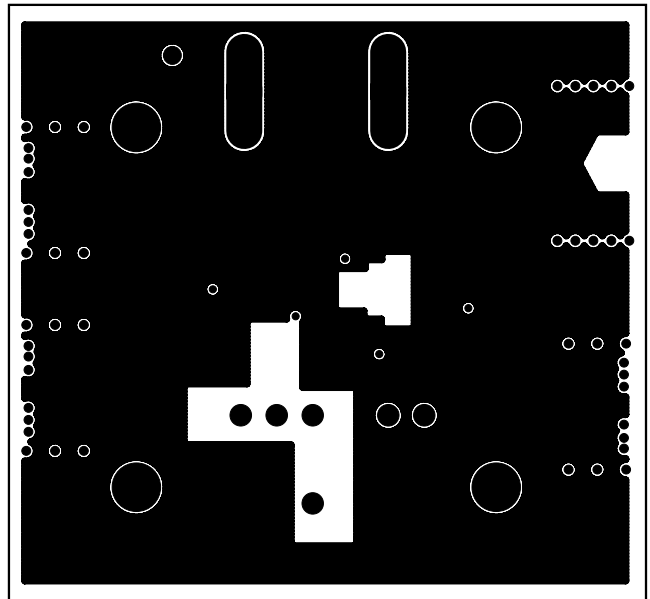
MAX3812 EV Kit PC Board Layout—Power Plane
